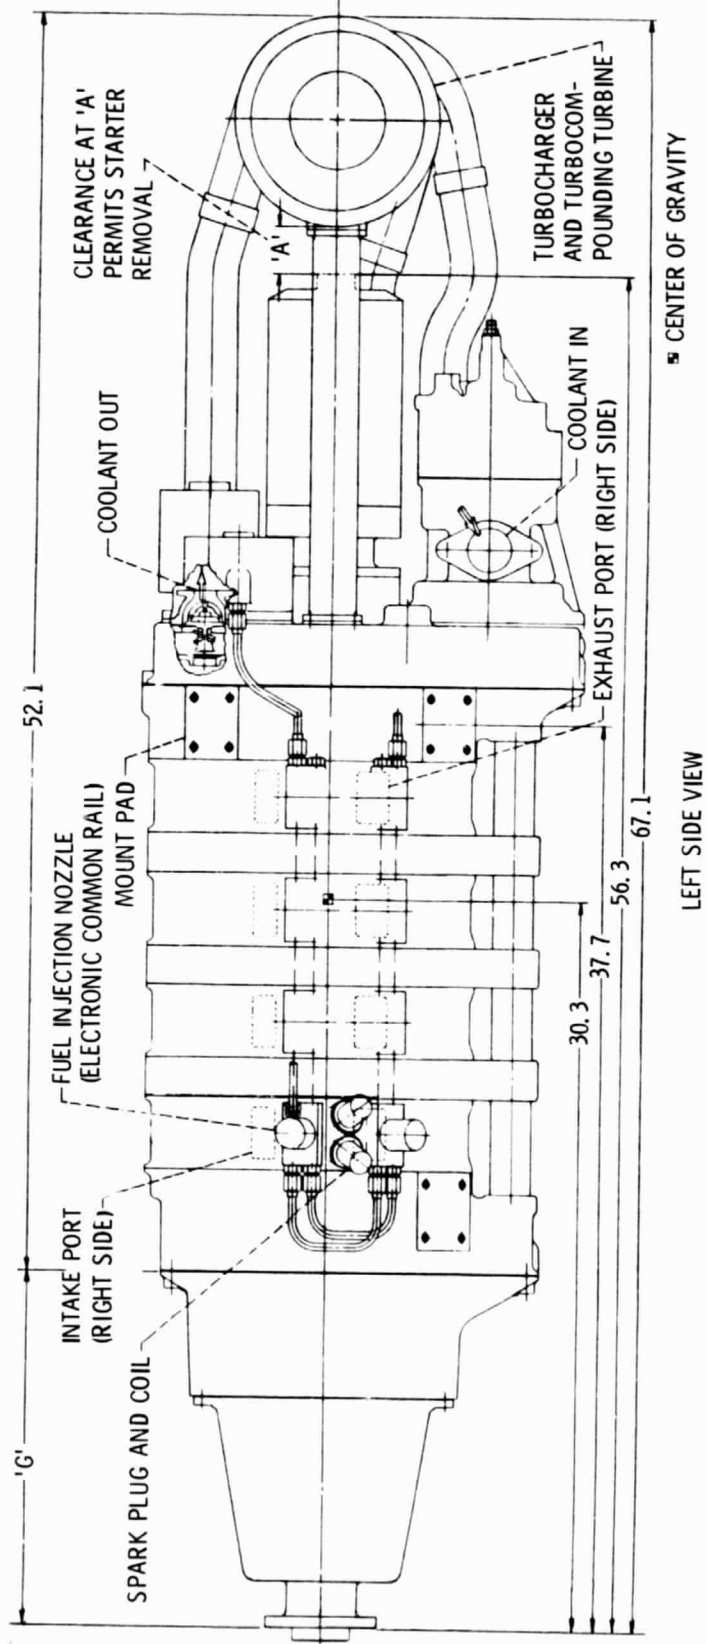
Installation drawing of highly advanced rotary combustion aircraft engine - 800 hp. (End view is a circle of 19 in. diameter. For dimension 'G' see gear reduction curve configuration shown for 1500 propeller rpm.)
